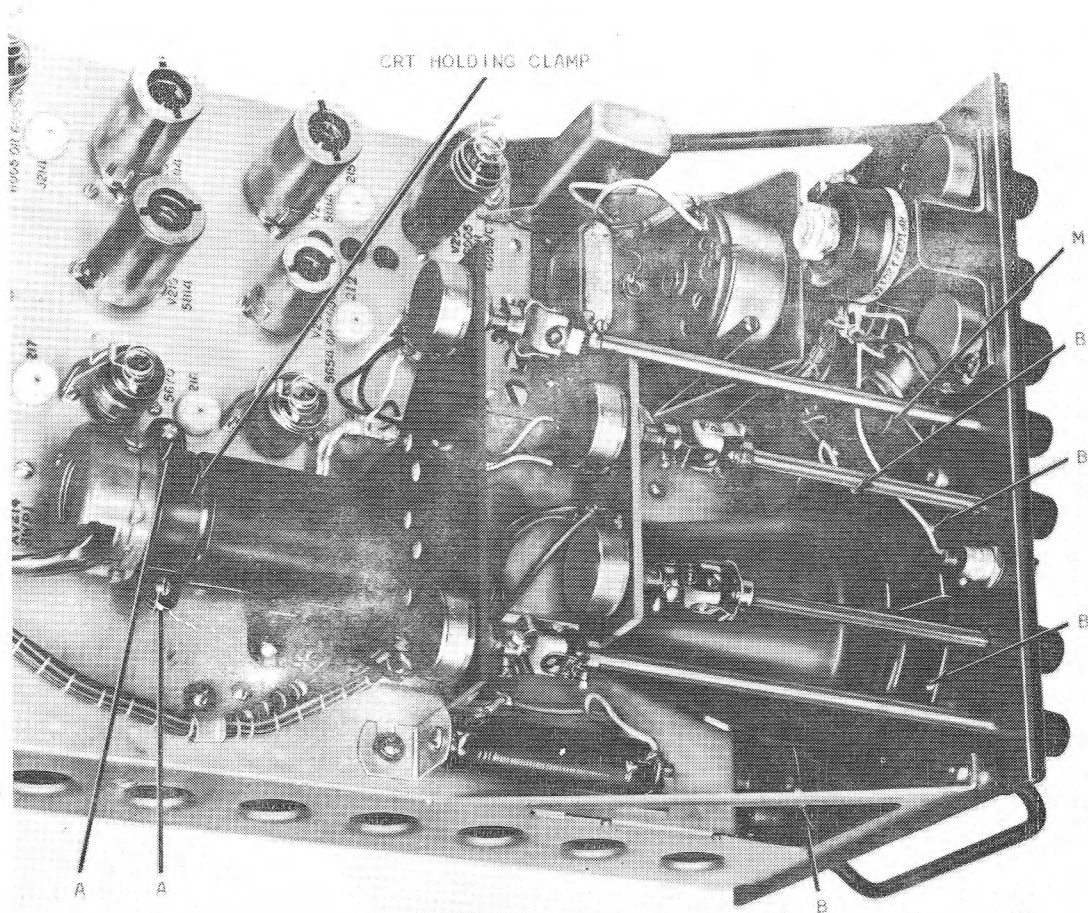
Azimuth Indicator IP-243/ALA-6, Cathode-Ray Tube Mounting Detail
